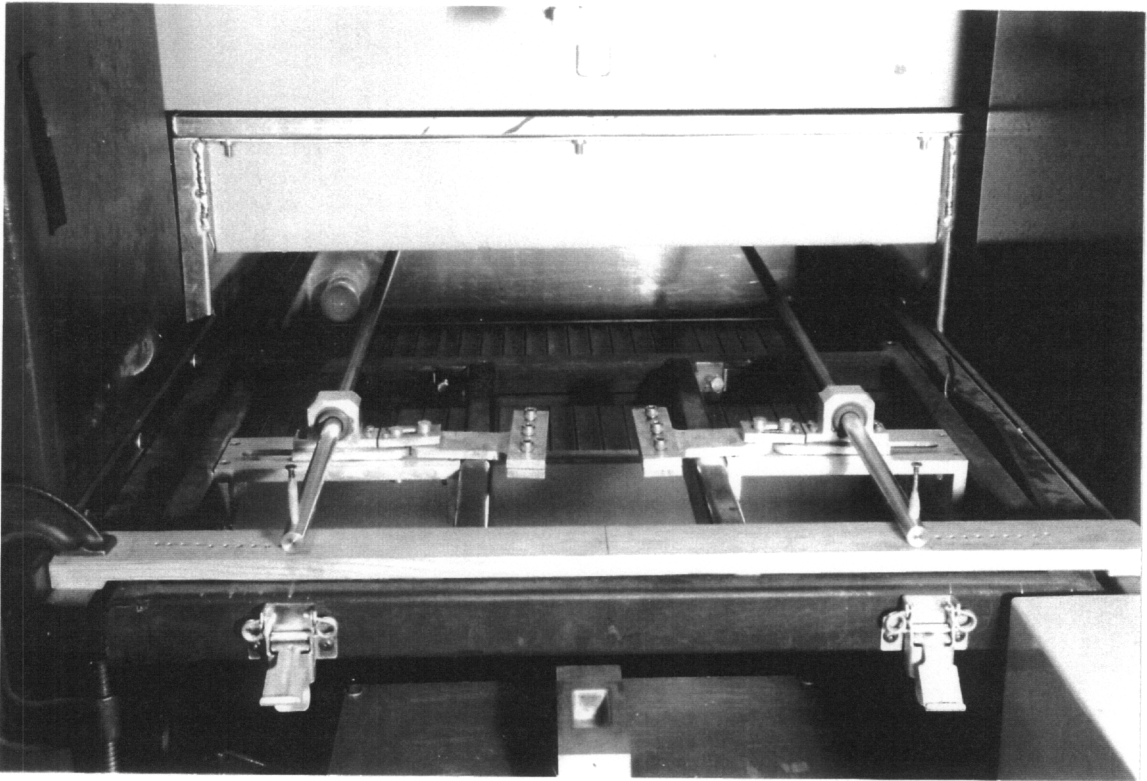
Photograph of modified clamping assembly for stretch-thermoforming process.
